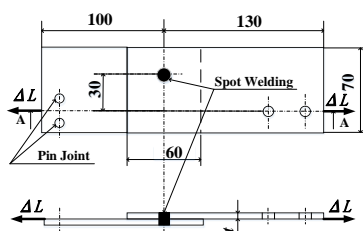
Spot-welded joints used for fatigue testing under torsion shear
